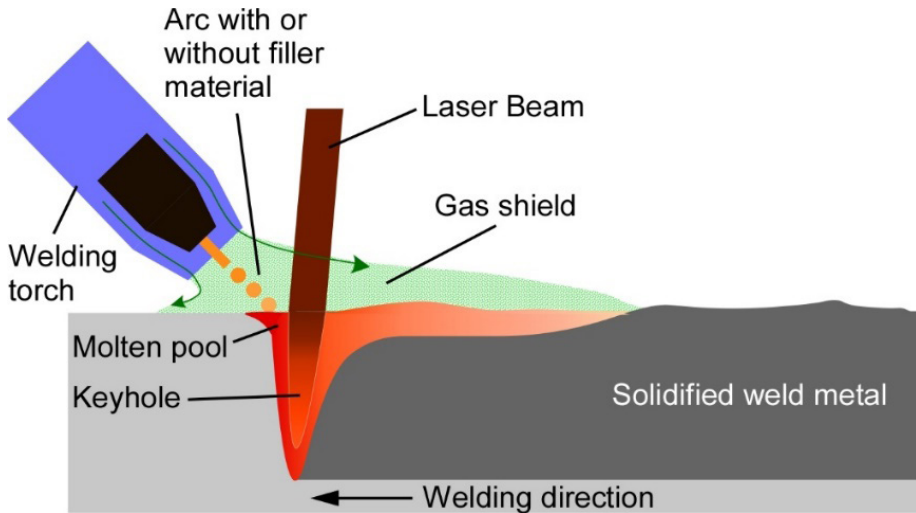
Schematic representation of laser-arc hybrid welding process.
